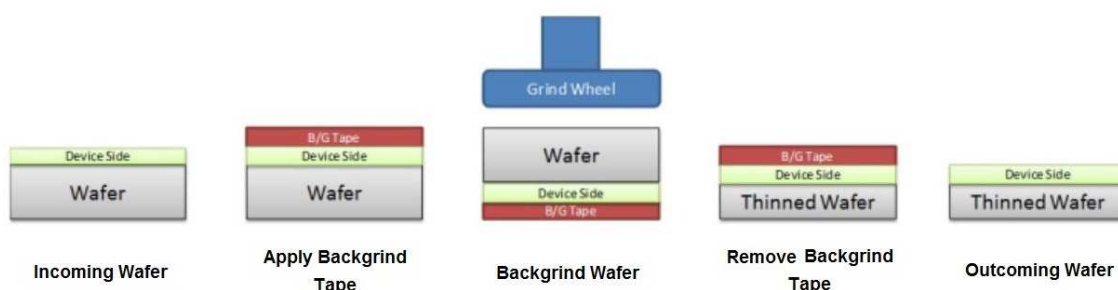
Conventional mechanical wafer grinding process flow sketch [6].
